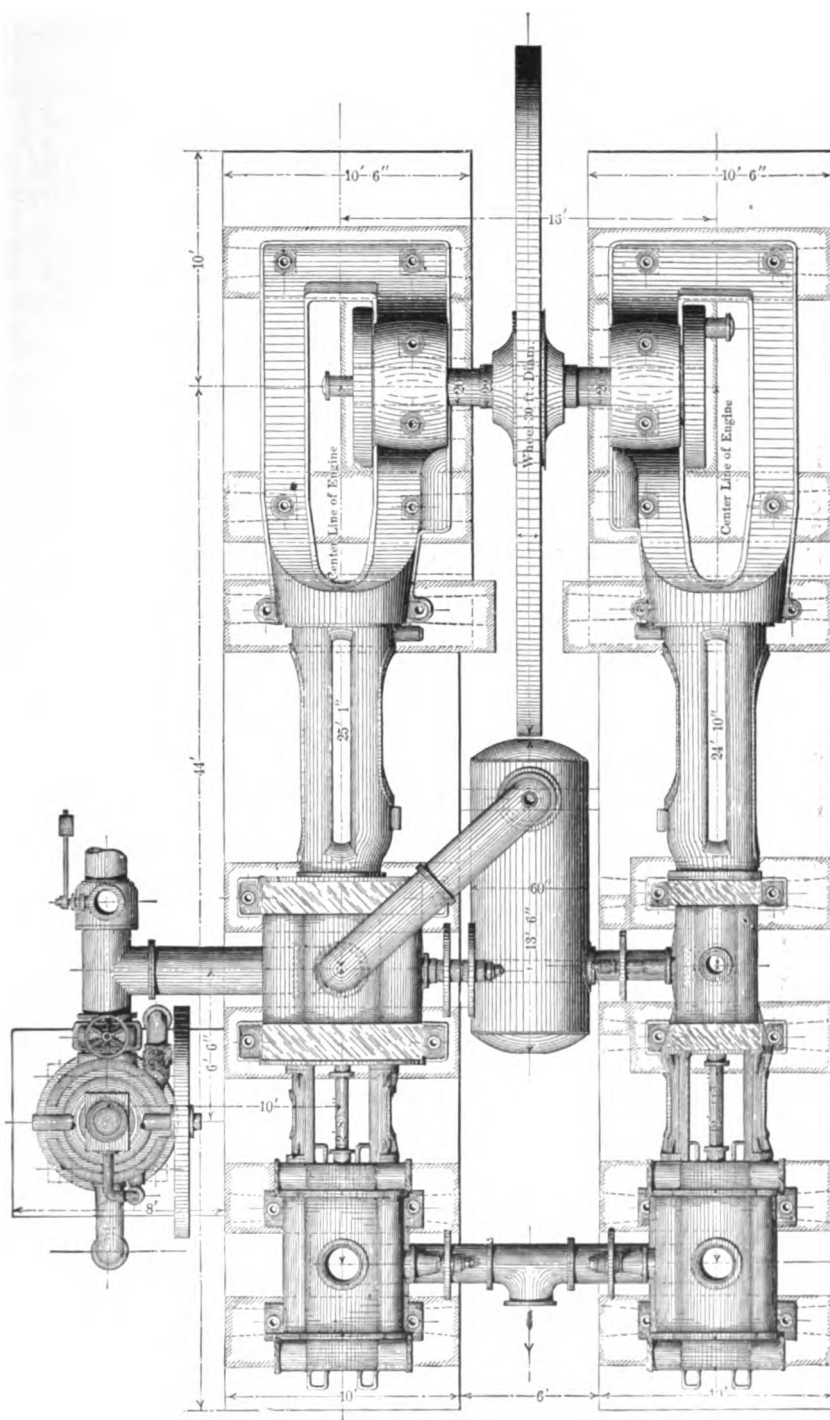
A CROSS-COMPOUND TANDEM, HORIZONTAL BESSEMER BLOWING ENGINE, BUILT BY THE E. P. ALLIS CO., MILWAUKEE, WIS. 40x78x60-INCH STEAM CYLINDERS AND 60x60-INCH AIR CYLINDERS.
